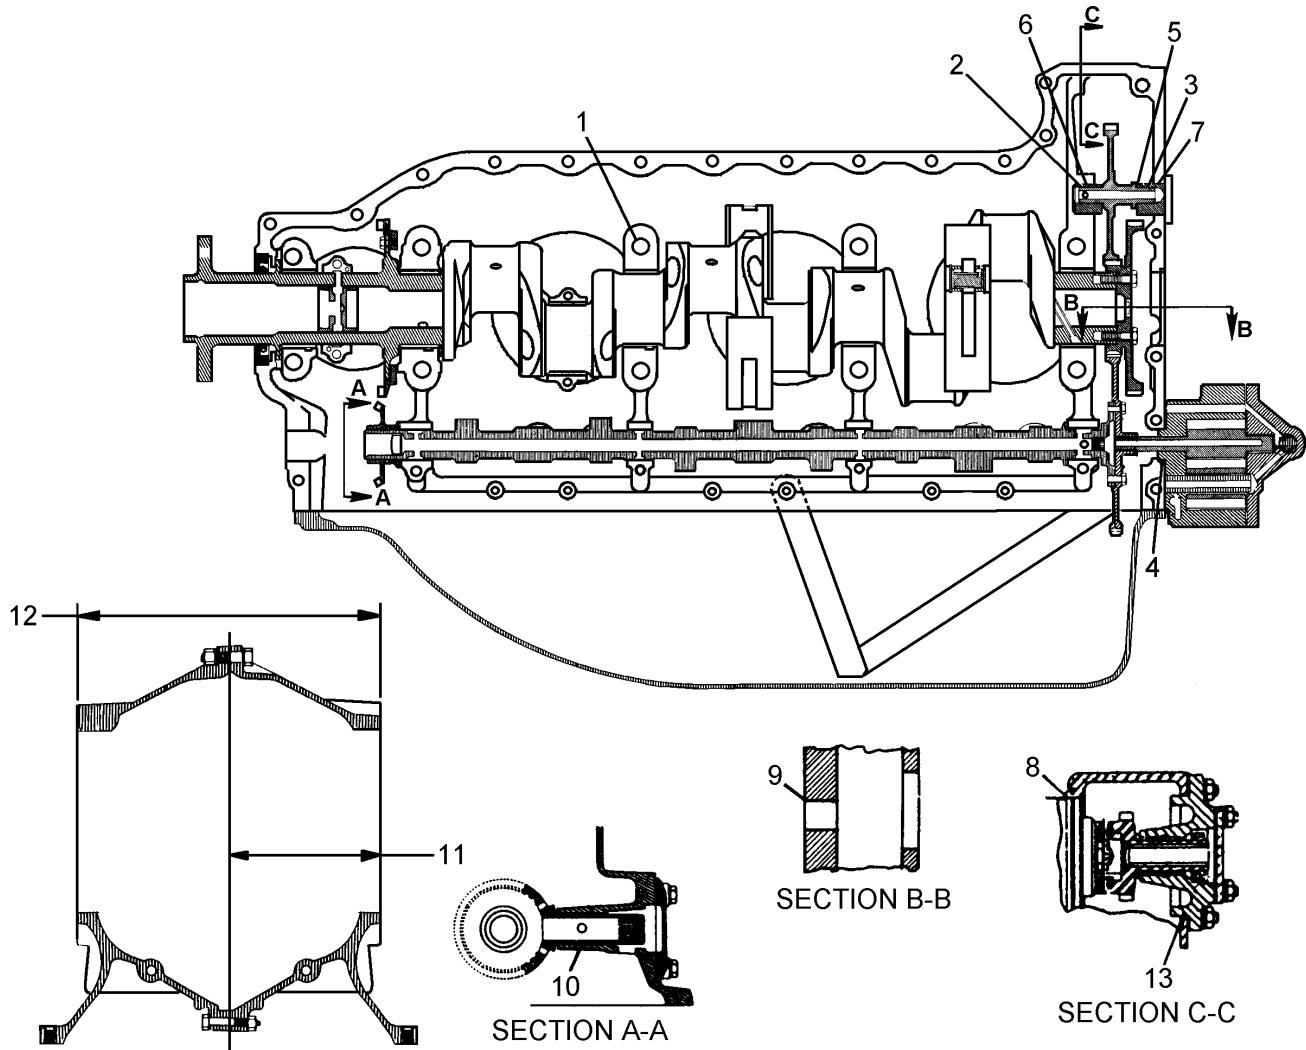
DIMENSIONAL INSPECTION TORQUING SEQUENCE
